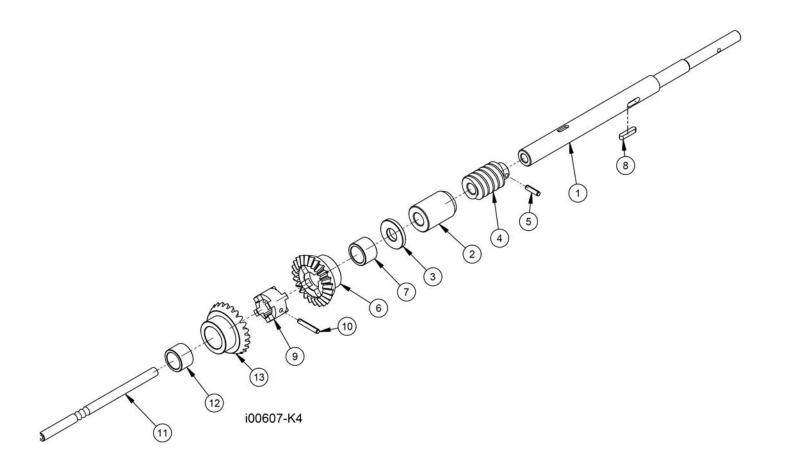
Quill Pinion Shaft Sub-Assembly P/N: 20698-3
